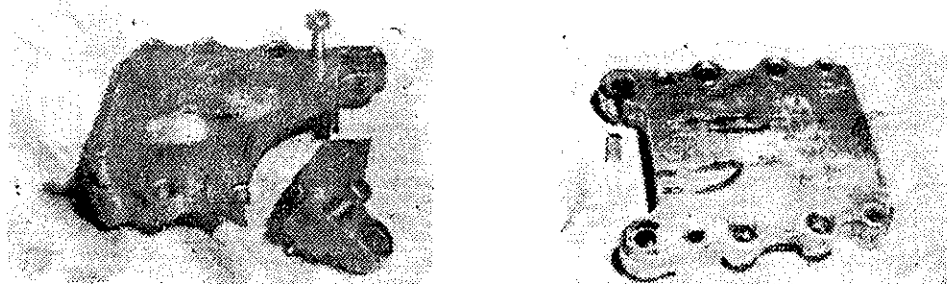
Fatigue Failure of the Blade Metal Fitting
